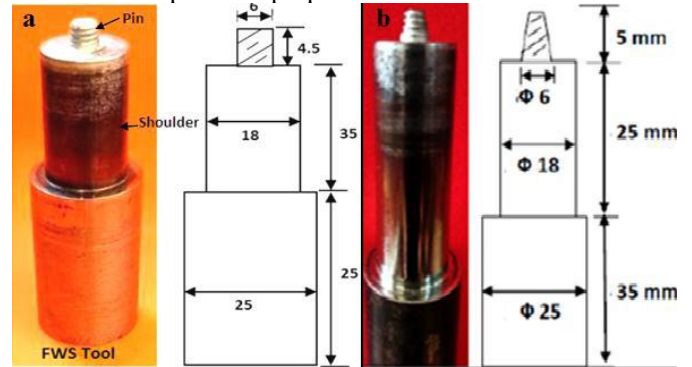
Friction stir welding tool (a) Cylinder tool (b) Taper threaded tool
